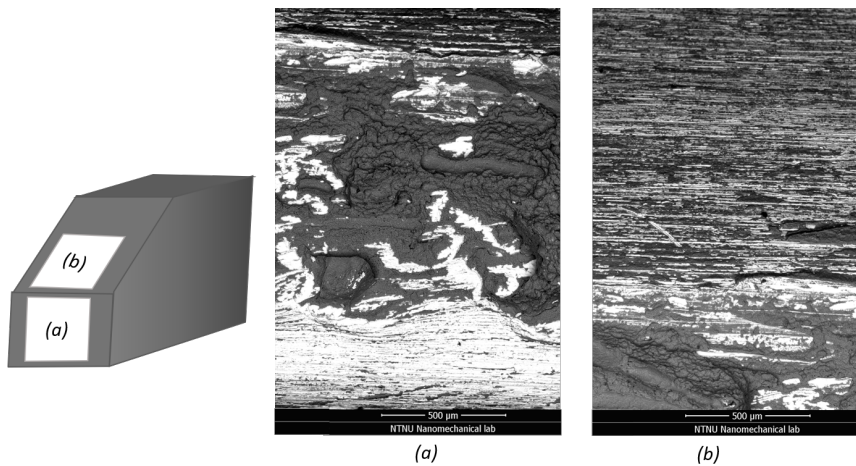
BSE micrographs at low magnification (100x) showing the (a) lower and (b) upper part of the steel fracture surface of specimen 2.
